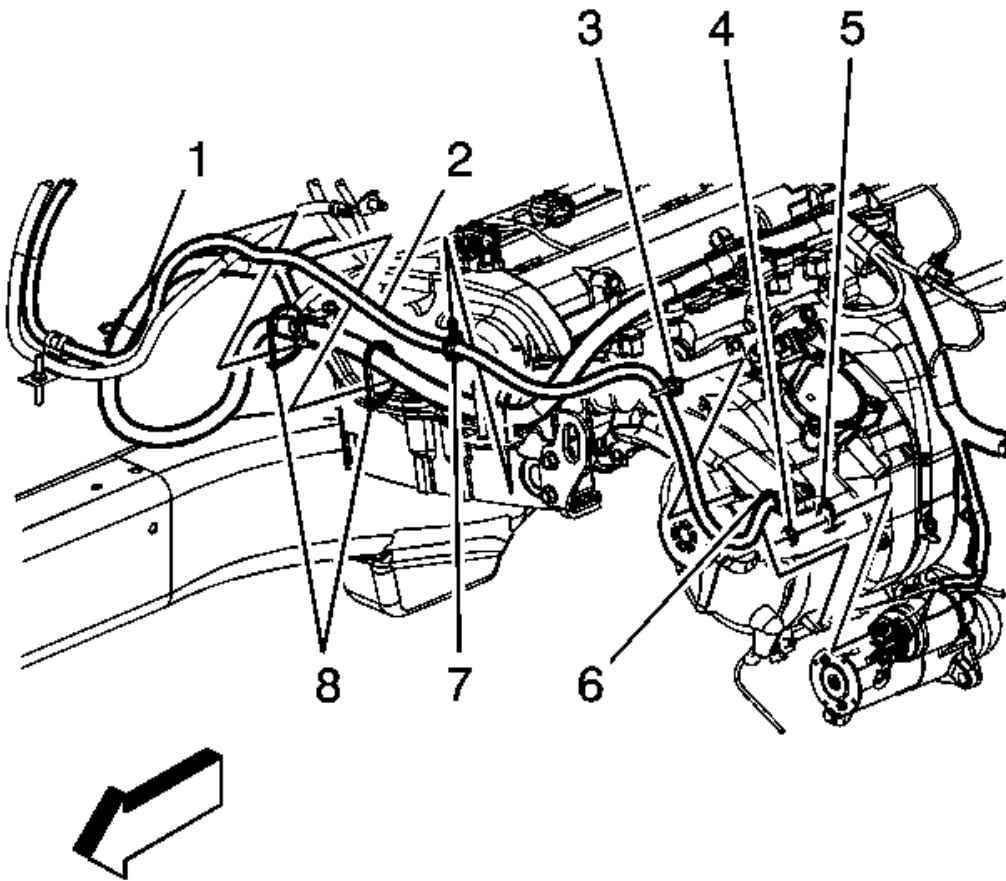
Identifying Engine Harness Tie Straps & Cable Clips
